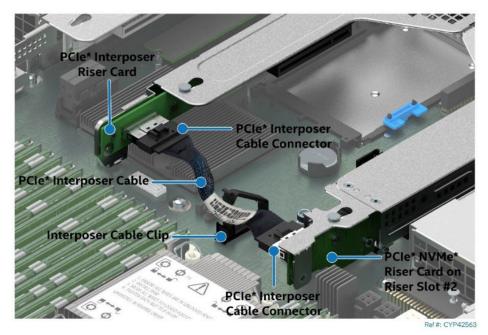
PCIe* Interposer Riser Card to PCIe* Riser Card Connectivity
